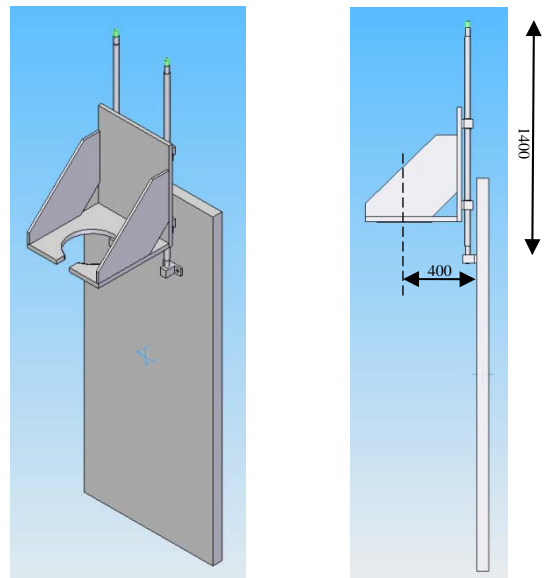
Schematic drawing of the initial designed upper carriage for the FAMeCT.
